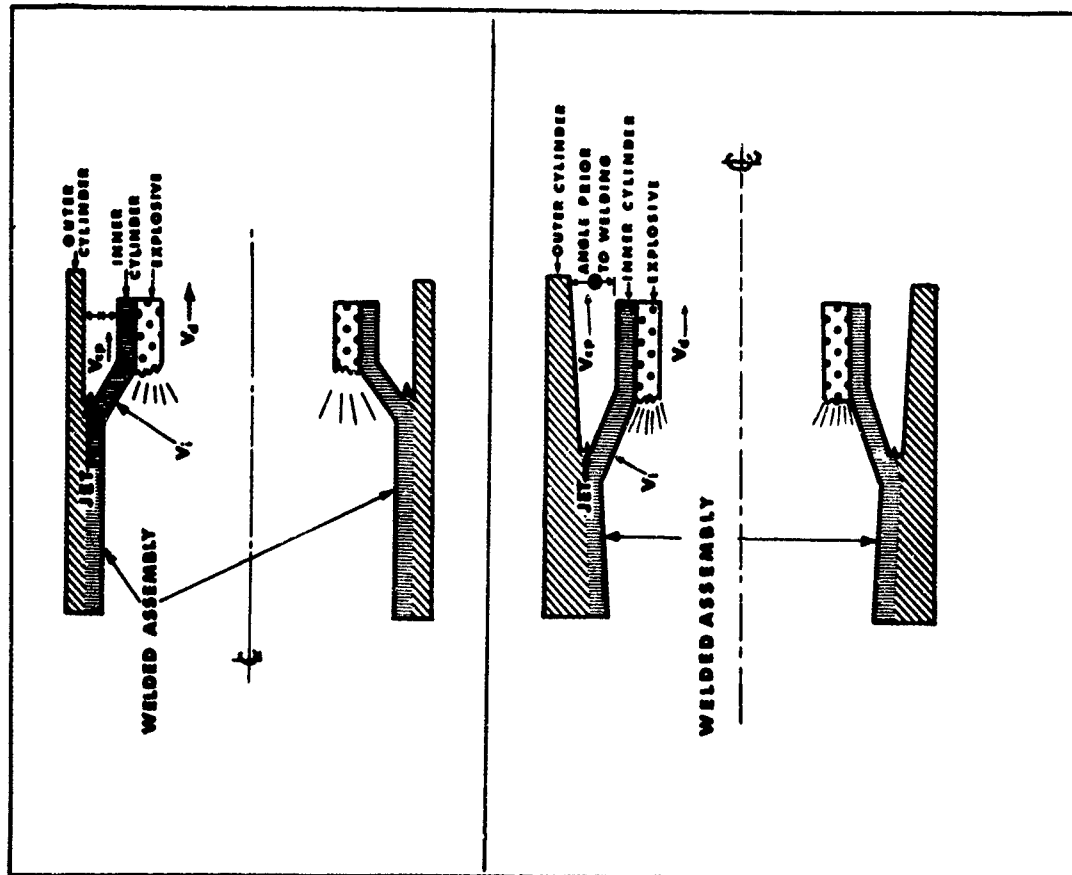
Schematics of Explosive Welding for Cylinders. A (Top): Gap Technique; B (Bottom): Angular Technique.
